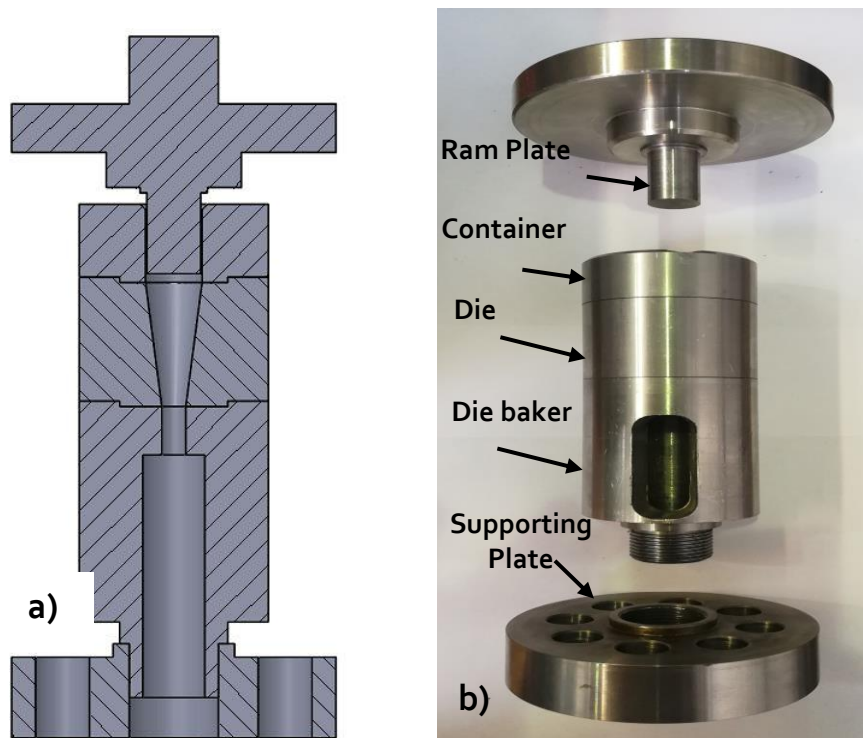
(a) schematic showing a cross-section of the assembly die extrusion and (b) disassemble parts of the setup.
